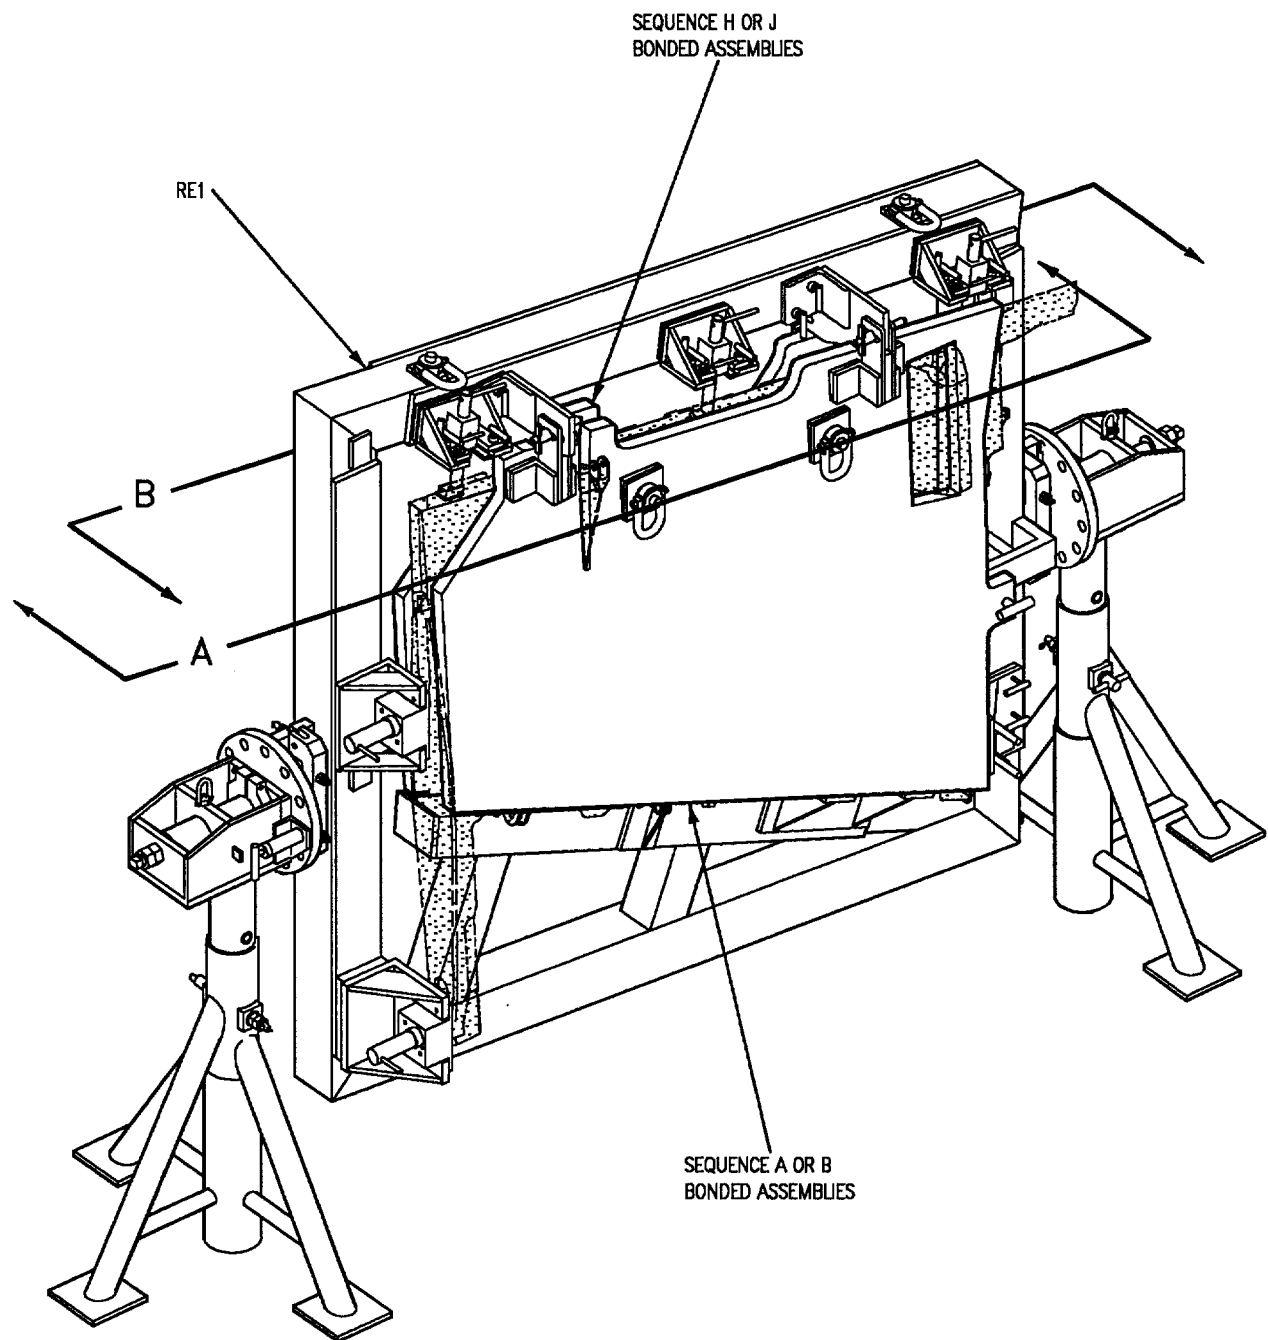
Drilling Holes in Skin or Substructure (Sheet 1)
